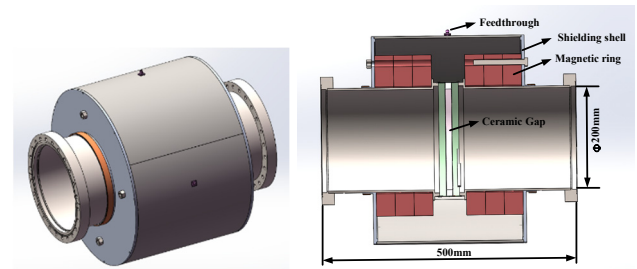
Three-dimensional drawing and cross-sectional view of the mechanical structure of WCM.
